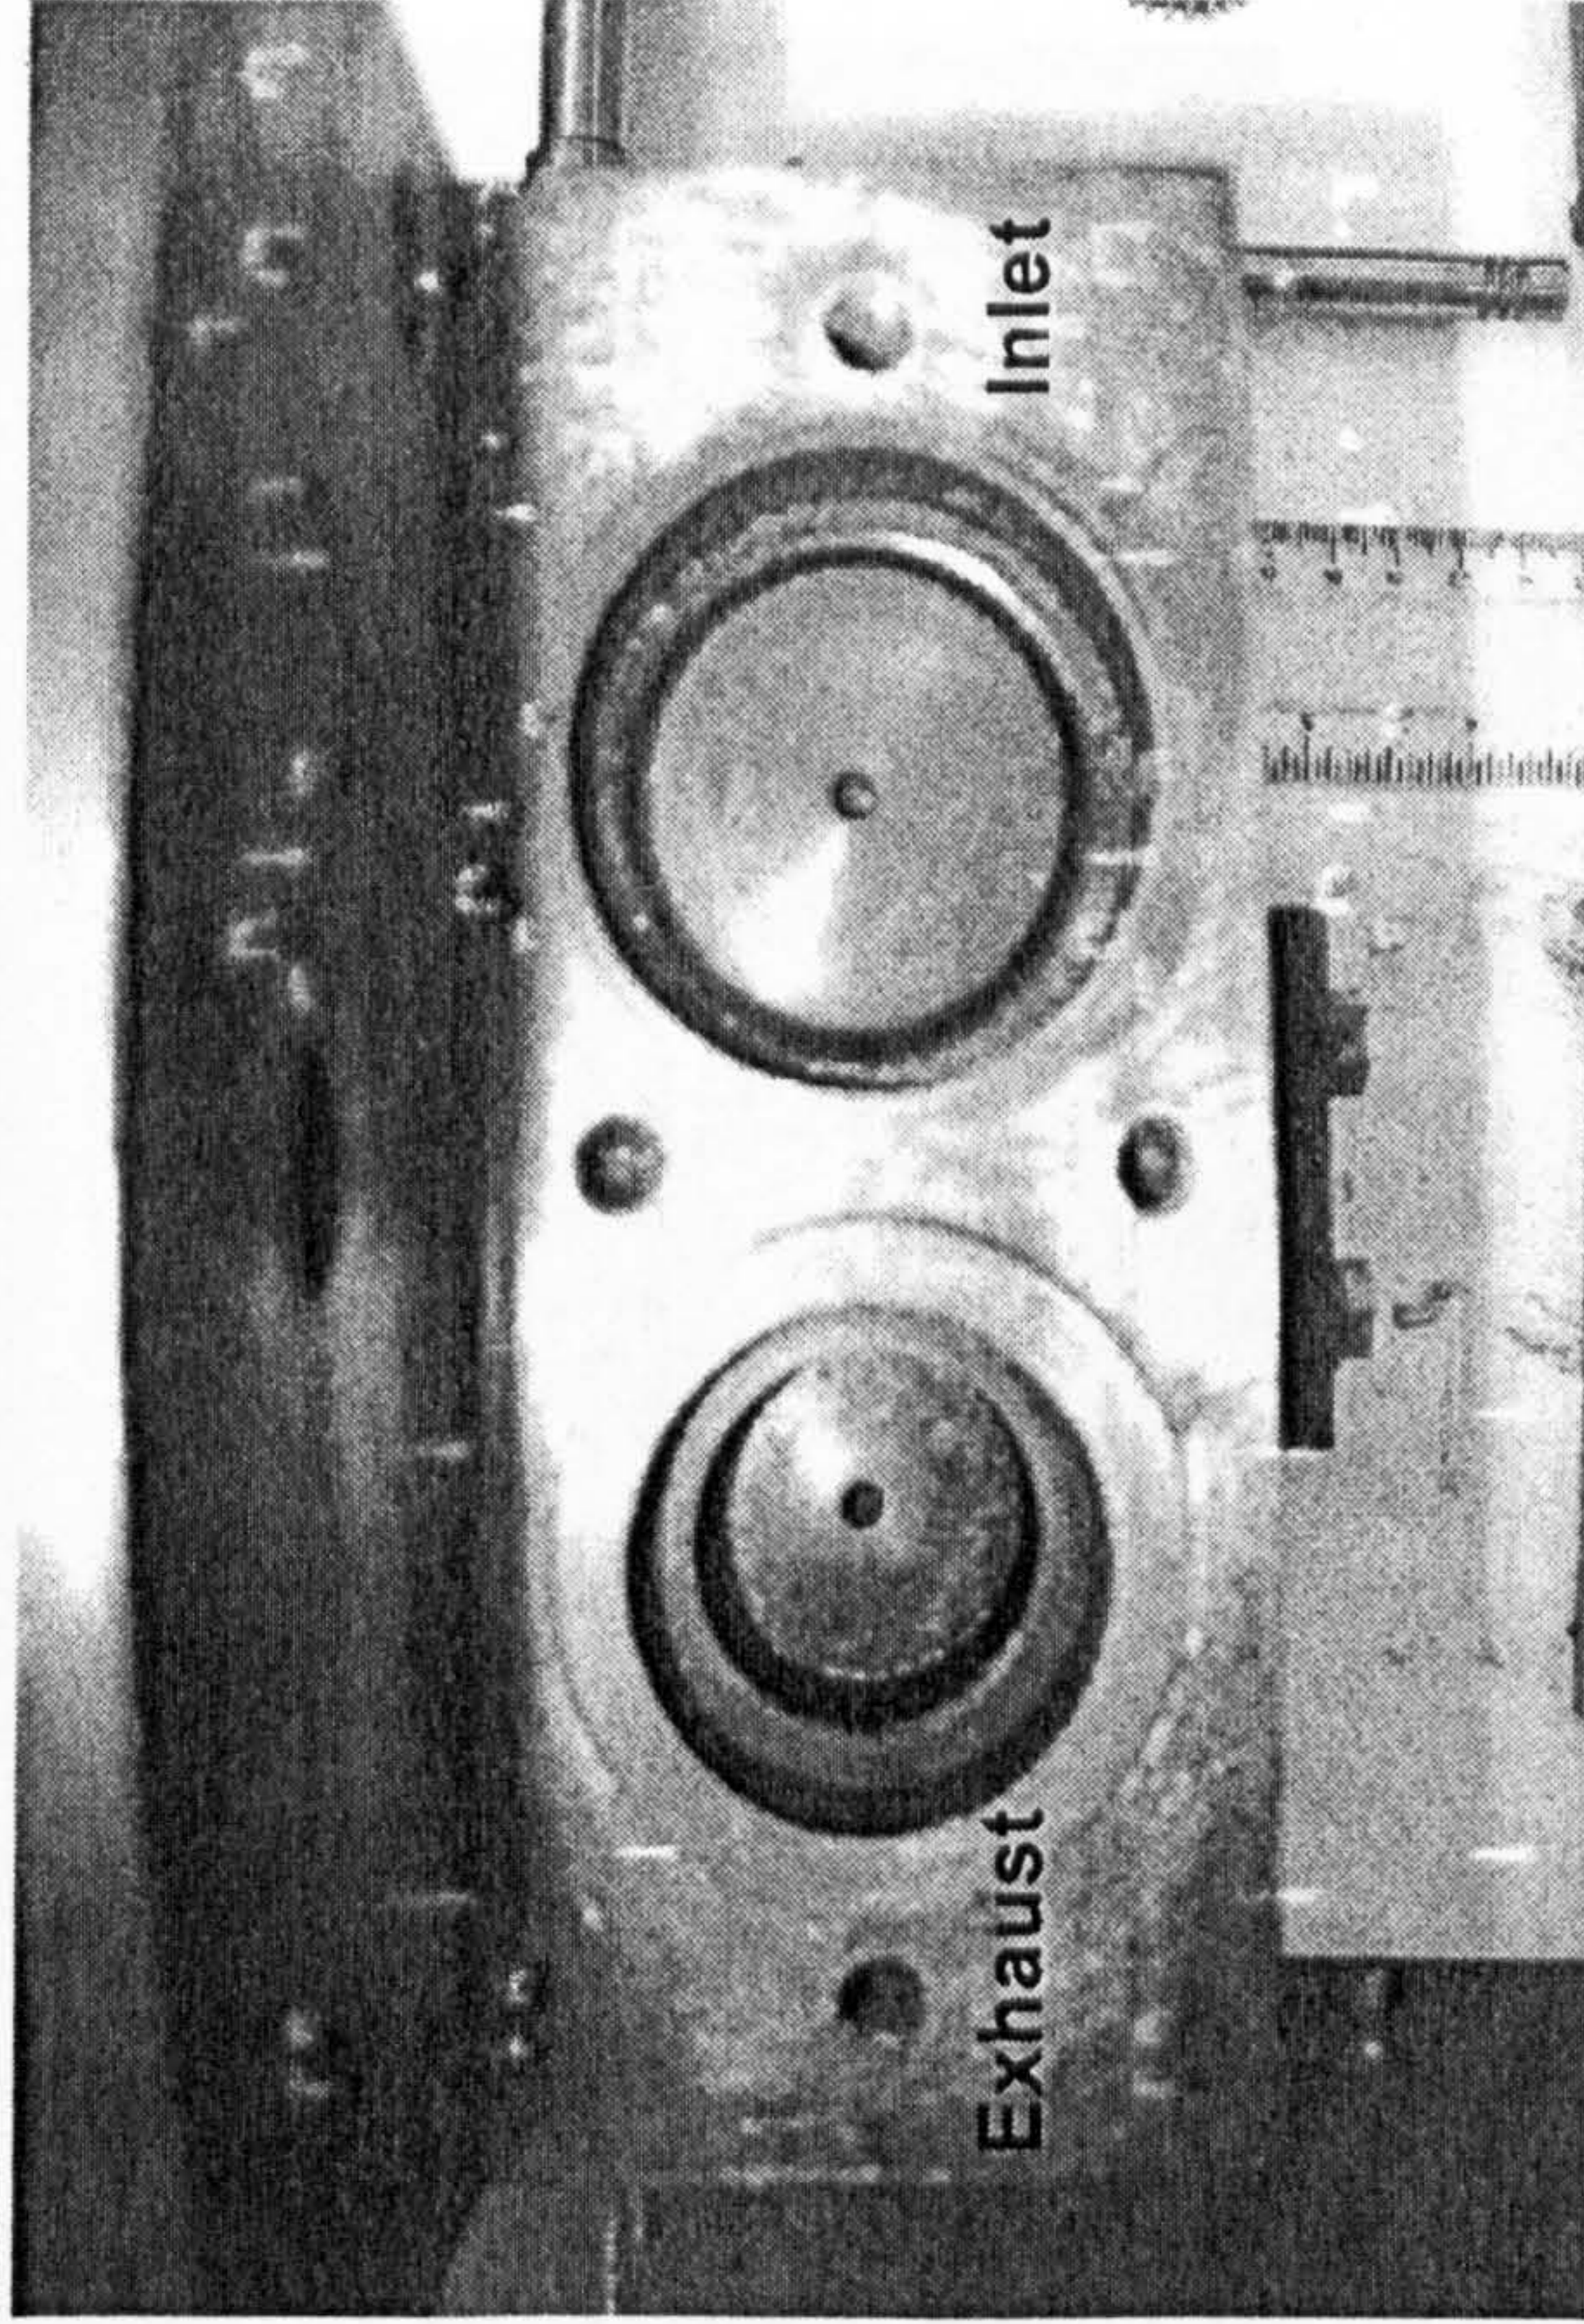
View of Valves from Inlet / Exhaust Cylinder Head Flange
